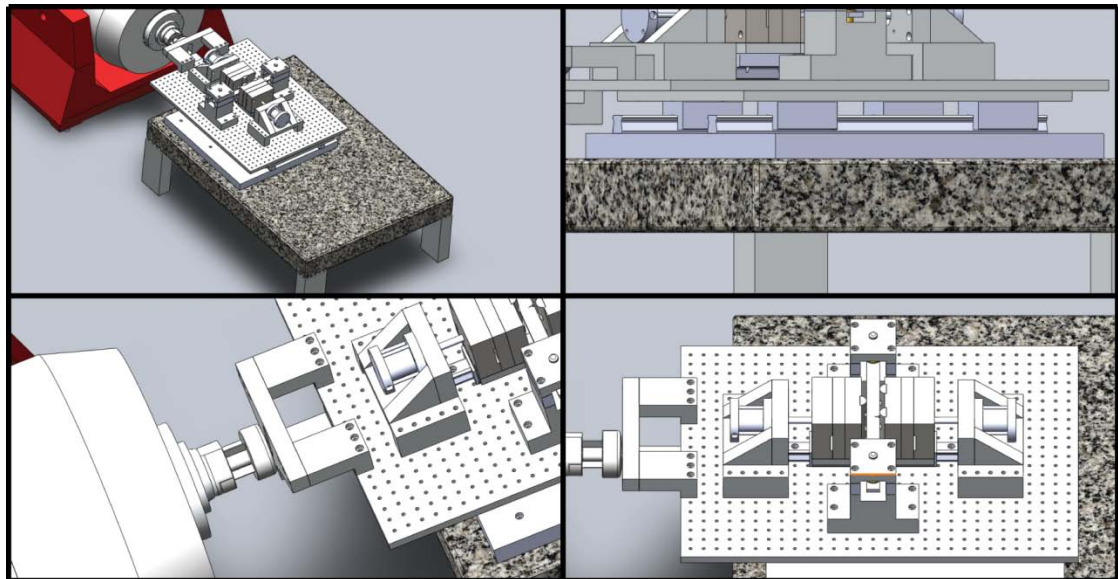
Model views of the apparatus. Top left: Granite base. Top right: Slip table mounted to linear bearings. Bottom Left: Zero axial backlash flexible coupling. Bottom Right: System components mounted to the slip table.
